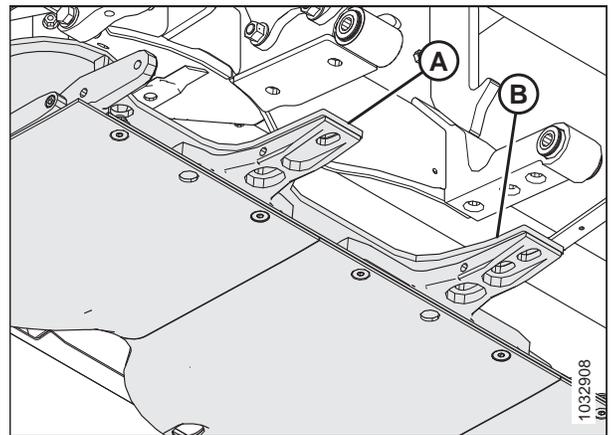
Cutterbar – Bottom View, Left End Shown
